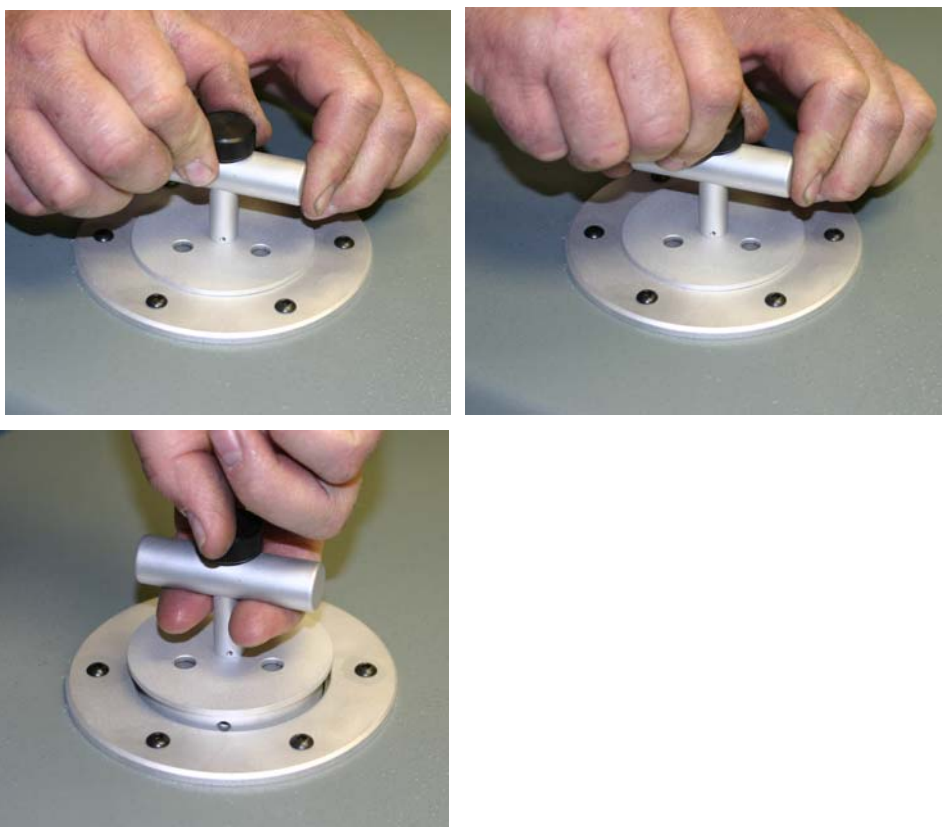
Insert handle, lift slightly on knob, screw tight, and lift straight up to remove.
